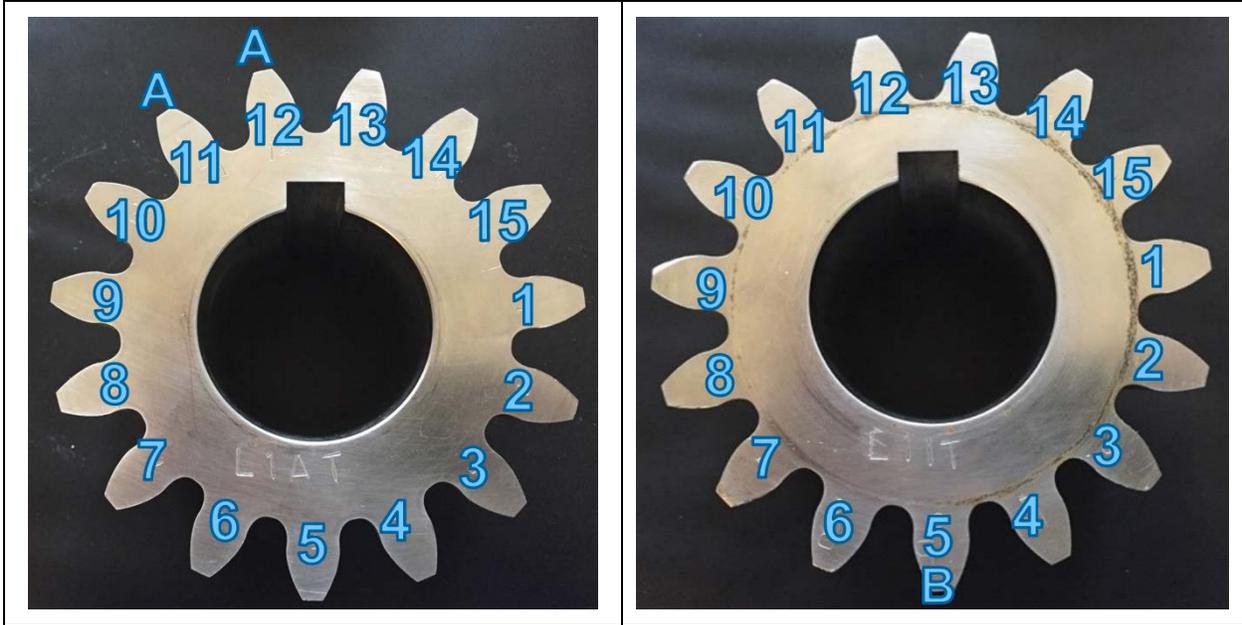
Pictures of the L1AT and L1IT gears with the gear teeth numbering labelled. The "A" and "B" notation are used to indicate where the gears mesh.
